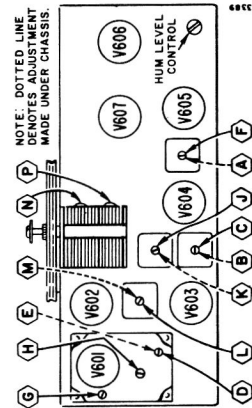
Top View of Tuner Chassis. Tube locations and alignment points shown.
